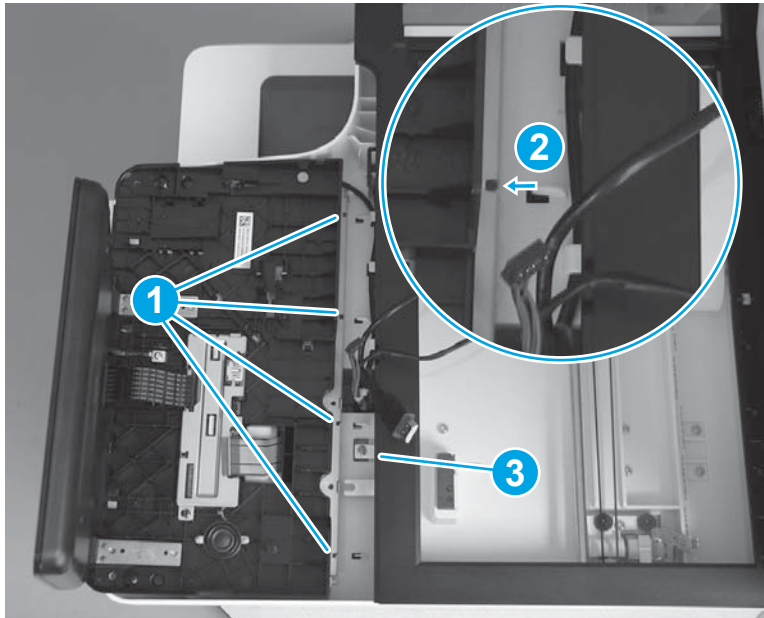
Check the keyboard flat cable (M527c/z)
